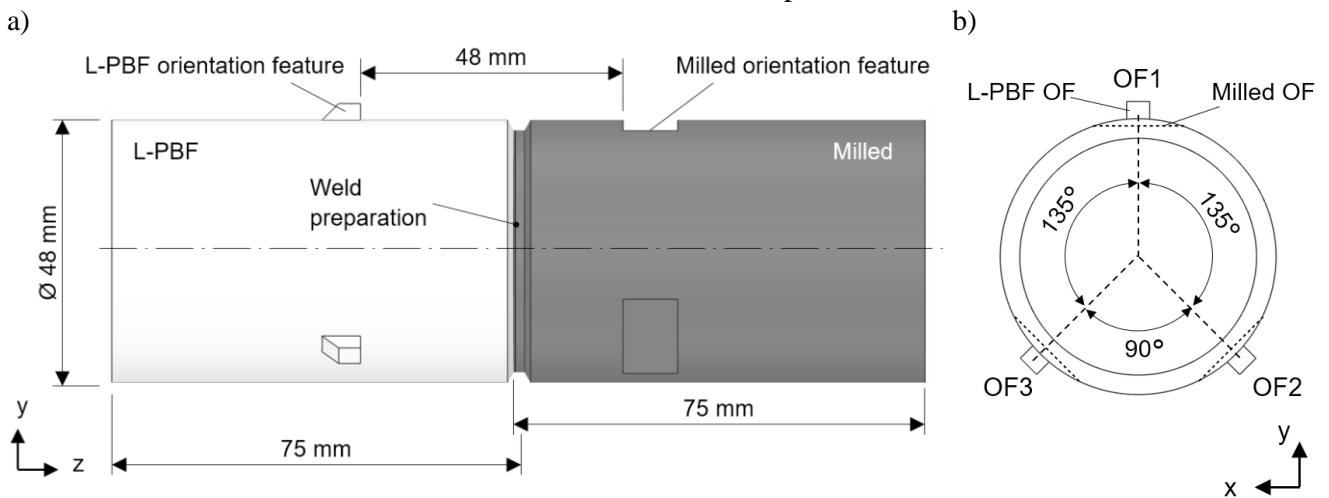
Specimen geometry: a) side view, b) front view of an assembled pair of welding pipes with positions of the orientation features (OF) used in all designs.
